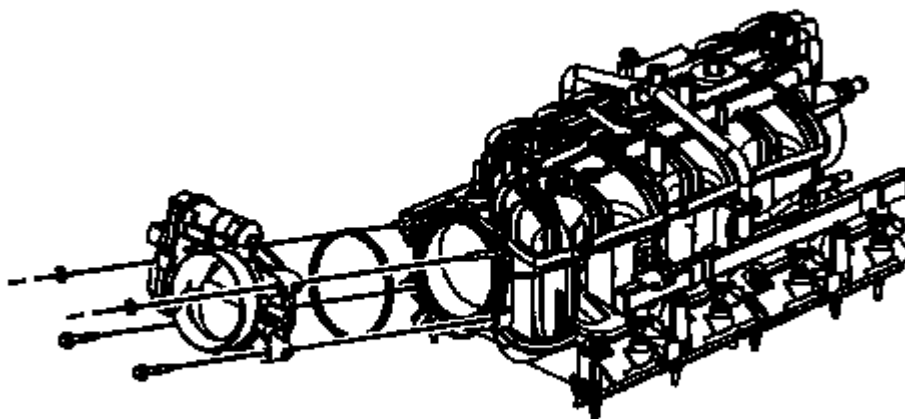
Throttle Body, Gasket And Bolts/Nuts
